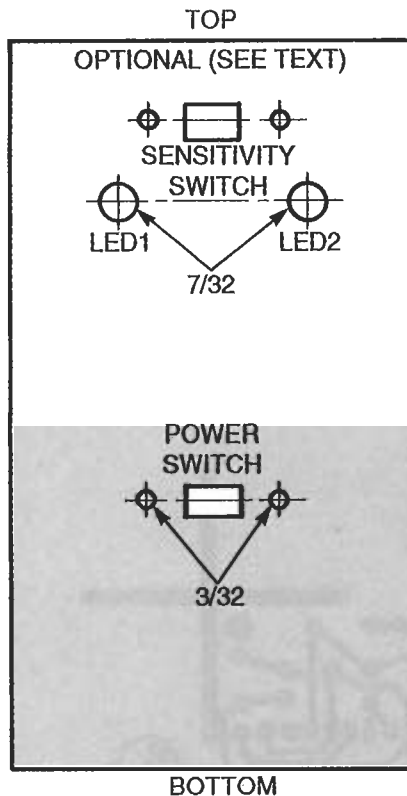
DRILL GUIDE. S2 is optional, so don't drill holes for mounting it if you're not using it.
